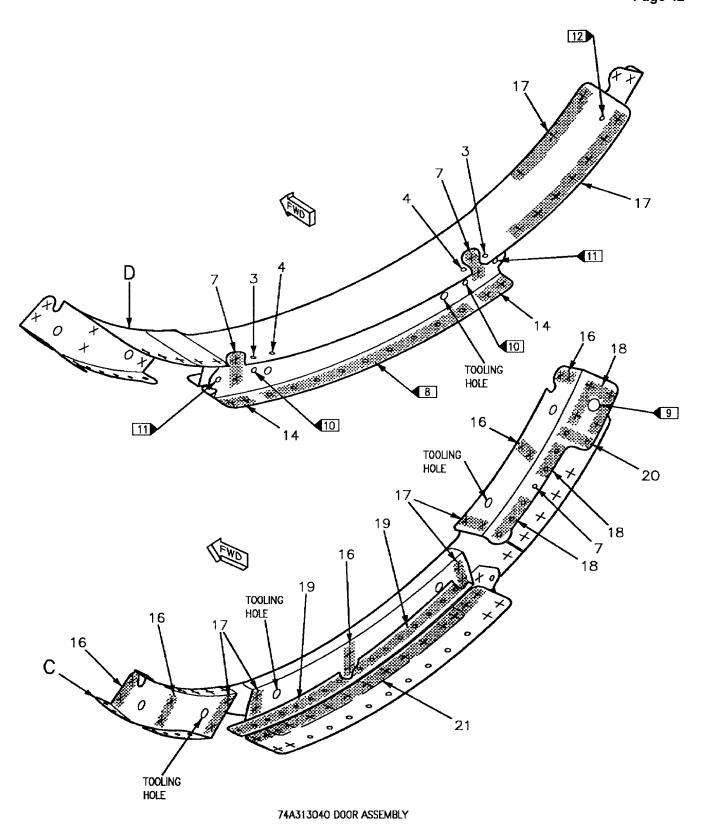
Former, 74A313188, Fastener Index (Sheet 2)
